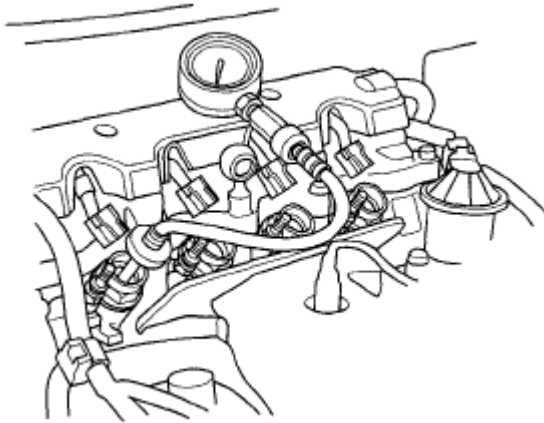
Attaching Compression Gauge To Spark Plug Hole
